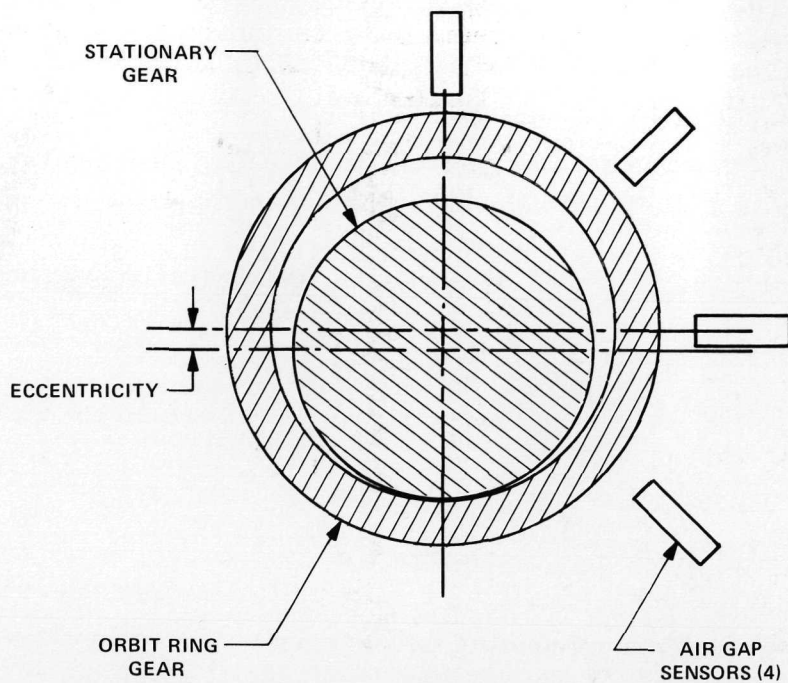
Flightweight Actuator Assembly (Rear View)
